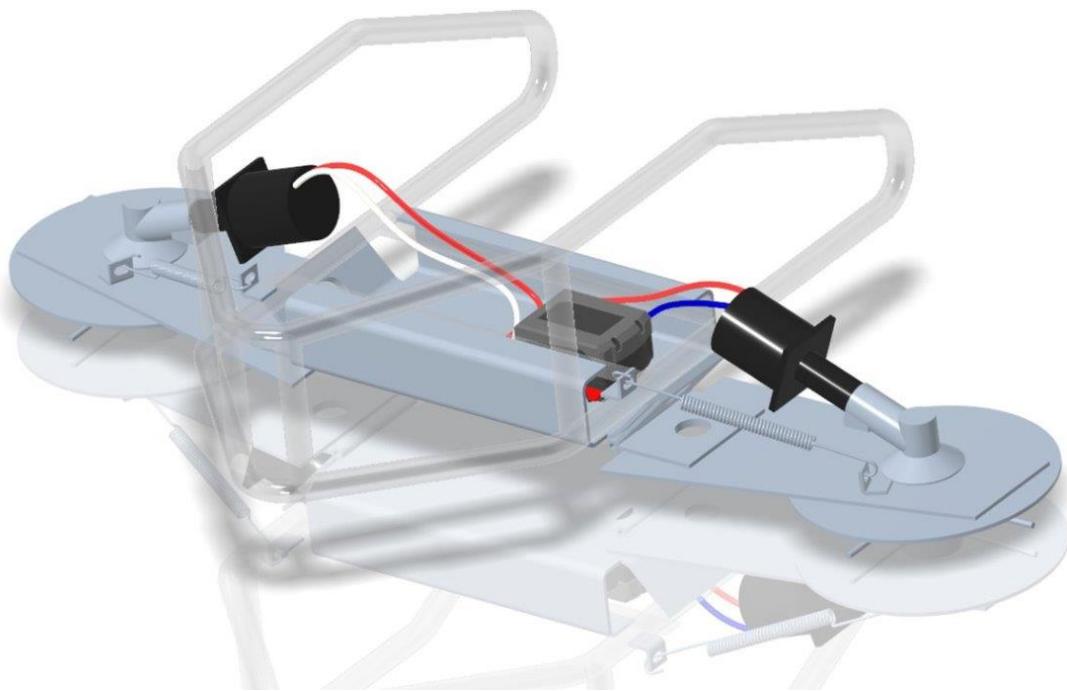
Cardboard Mechanical Design on Burley Trailer
